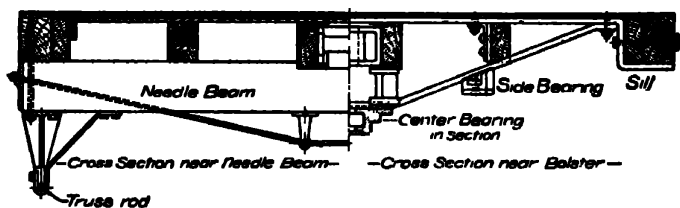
Cross-Section of Underframe Showing Needle Beam and Bolster
